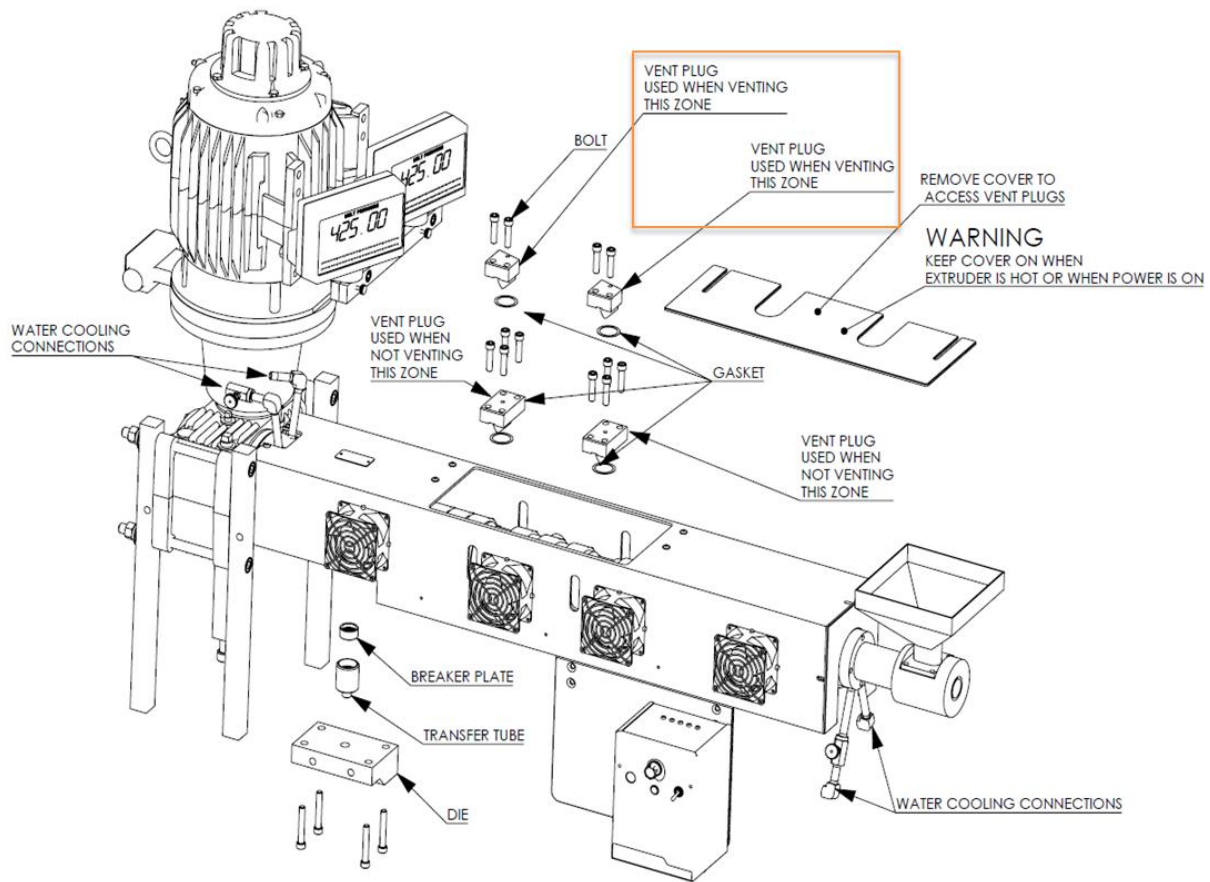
Exploded view of the Randcastle Microtruder Model RCP-1000 [19]
